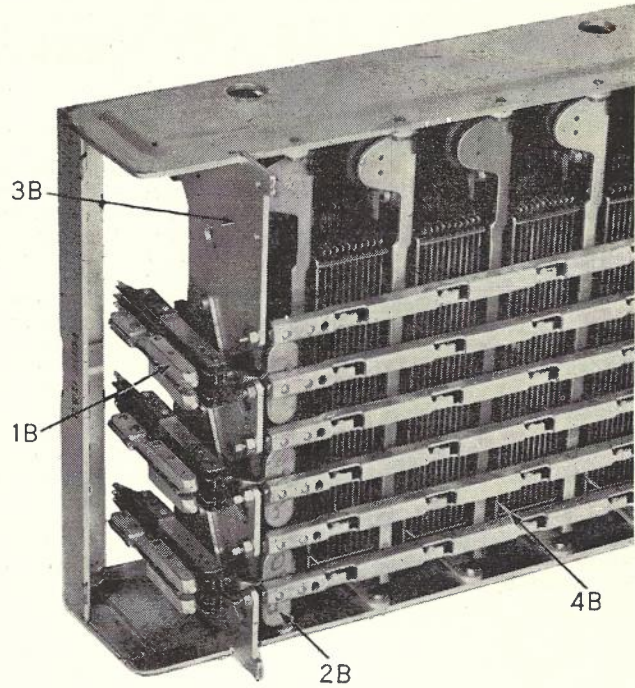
Old Crossbar Switch showing Loaded Buffer Springs (1A), Old Shape of Horizontal Armature (2B), Old Shape of End Plate (3B), Selecting Spring without Damper (4B).
